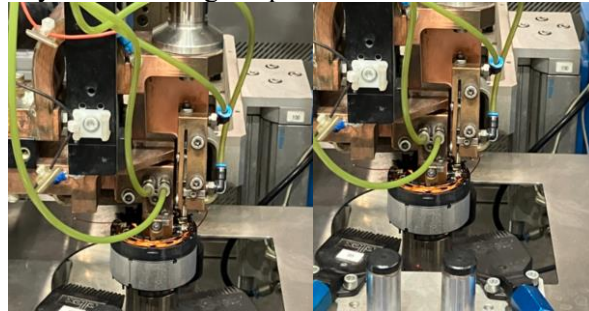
Welding the coil contact pin using two welding robots
